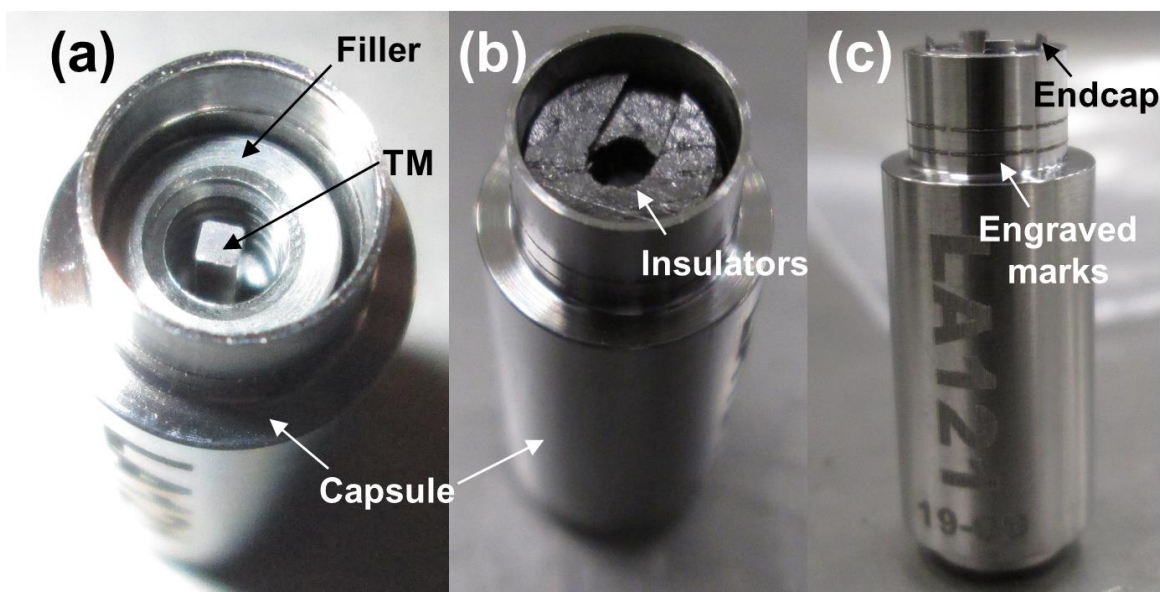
Loading TMs (a), insulators (b), and endcaps (c) into a capsule.
